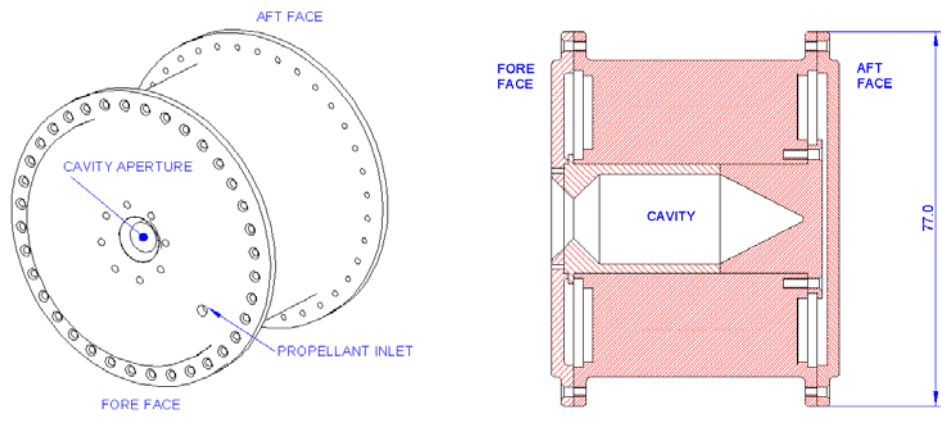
Intermediate design, 428 N-s flanged cavity receiver, B₄C particle bed in BN containment, insulation package removed to illustrate mechanical sealing, left. Flanged cavity receiver, engineering drawing cutaway view, insulation package removed, right (dimensions in millimetres).
